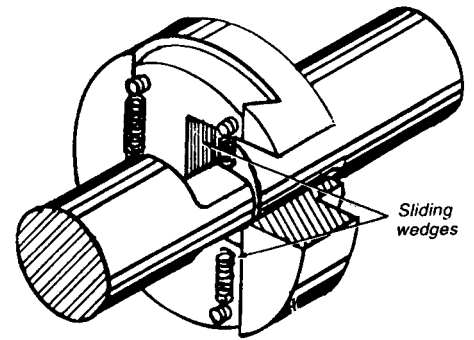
Sliding wedges clamp down on the flattened end of the shaft. They spread apart when torque becomes excessive. The strength of the springs in tension that hold the wedges together sets the torque limit.
